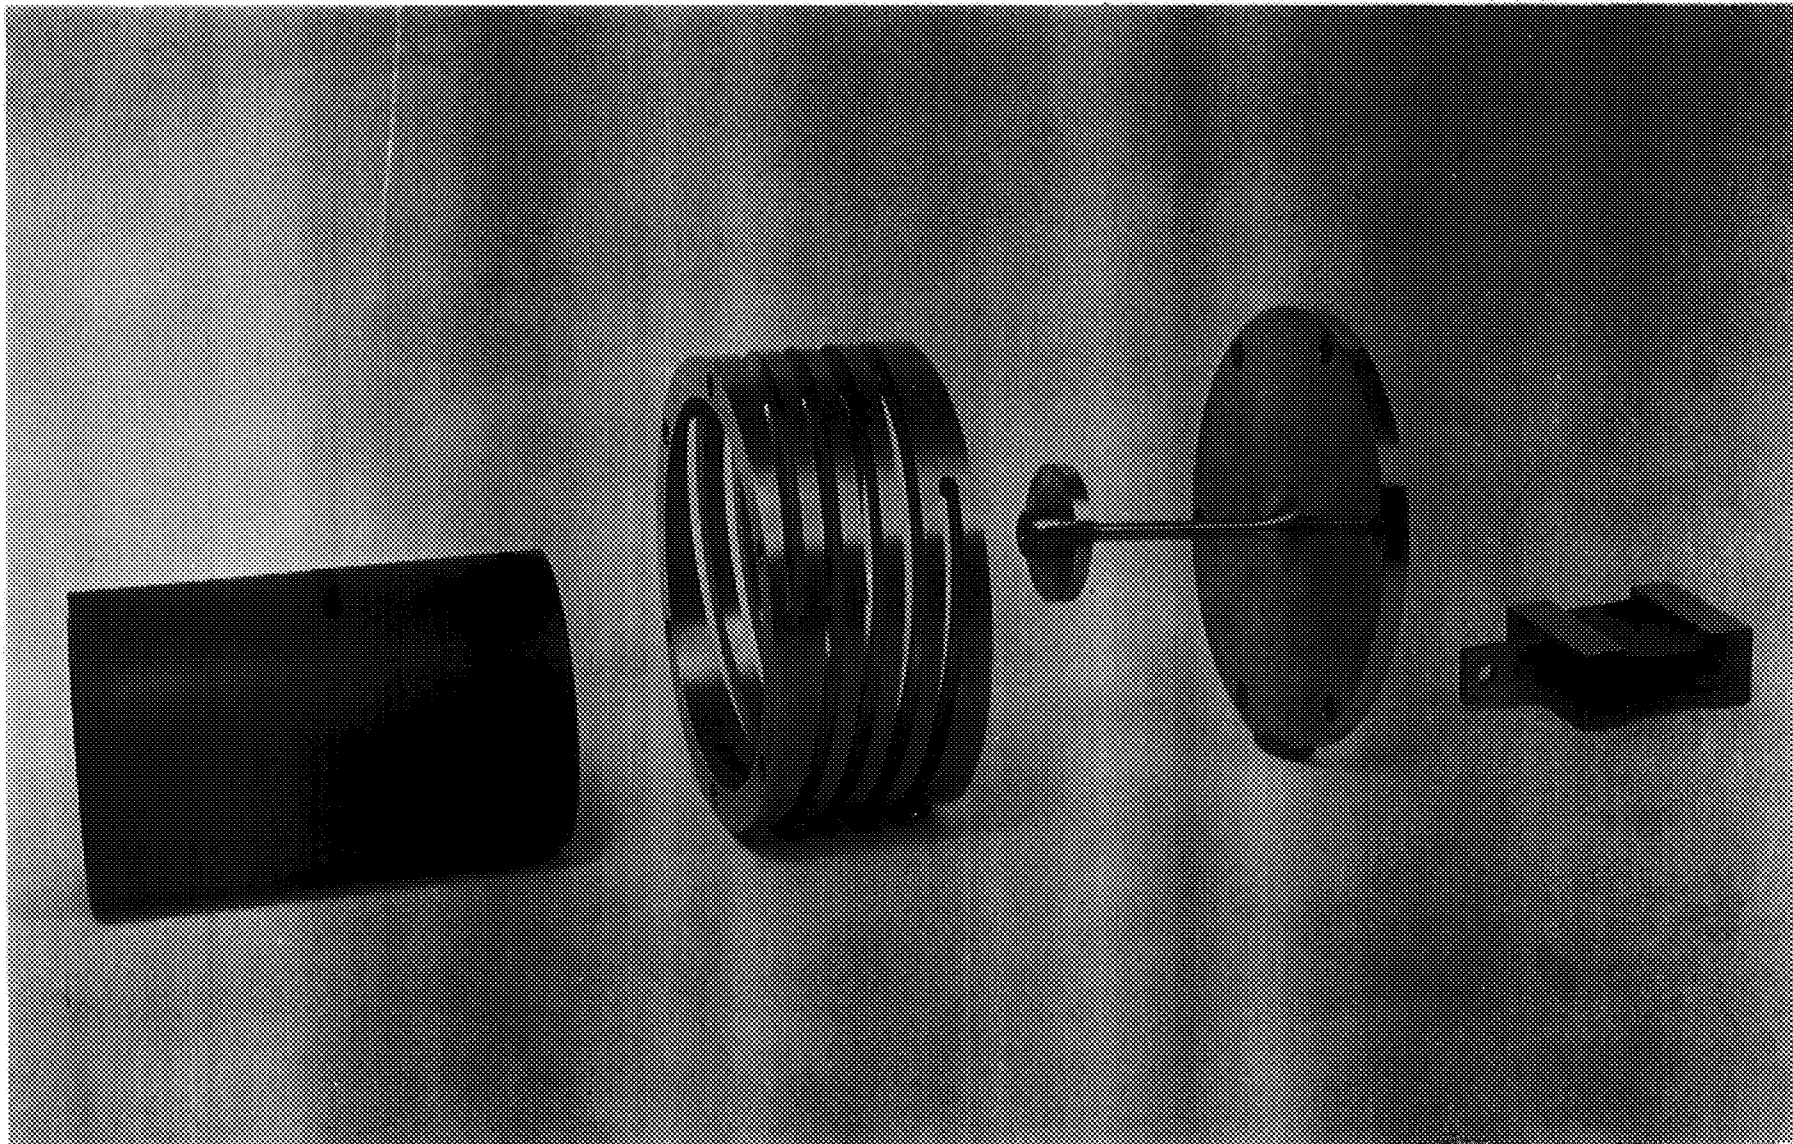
View of the Reciprocating Parts for the Improved Resonant Piston Compressor Developed Under Contract NAS 8-20720.
